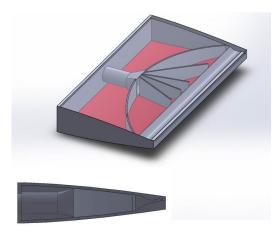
Trimetric and side view of the CAD Design - VI.
